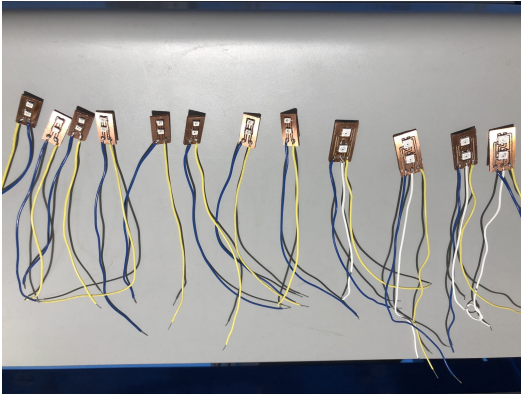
405 nm and 465 nm final PCB prototypes printed by the Bantam mill.
